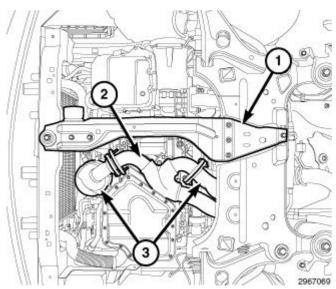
Front Engine Mount Bracket & Bolts Courtesy of CHRYSLER GROUP, LLC
